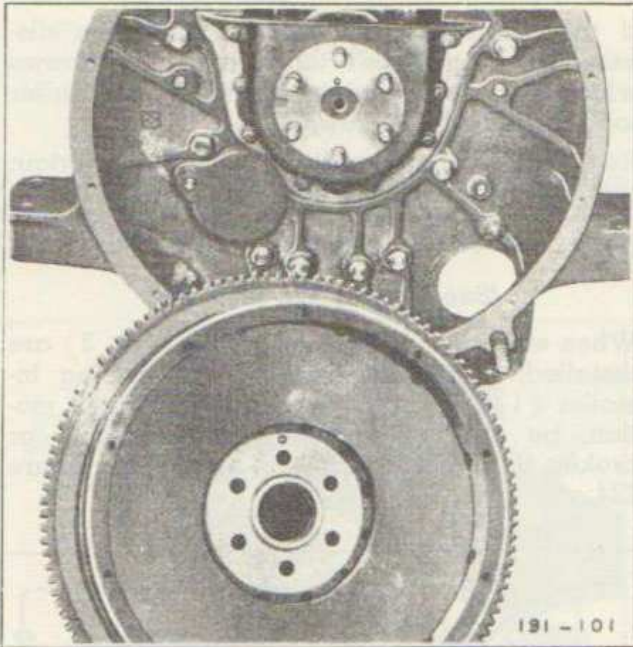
View Showing Markings on Flywheel and Crankshaft Flange
